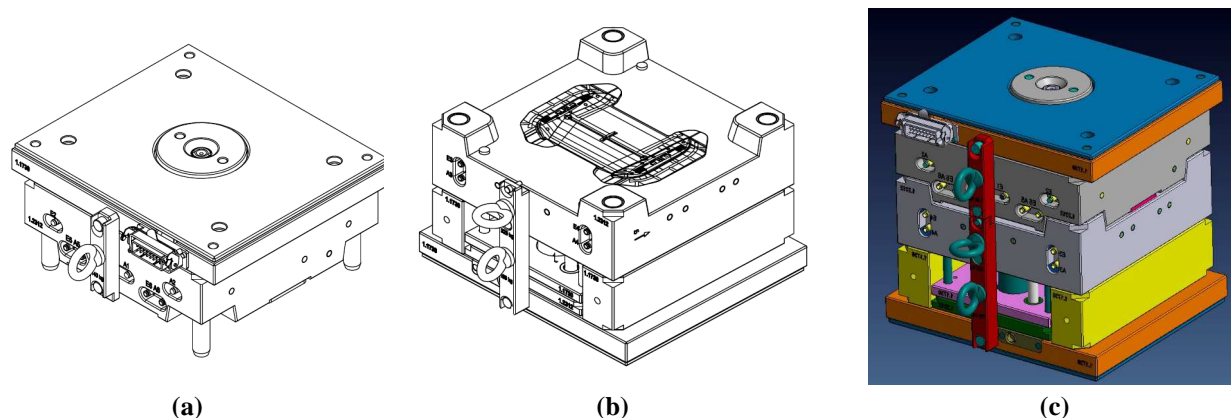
3D Model of Tools for Injection Molding of ASA Polymer: (a) Subassembly of Upper Fixed Side (FS) of Tools; (b) Subassembly of Lower Movable Side (MS) of Tools; (c) Assembly of Complete Tool.
